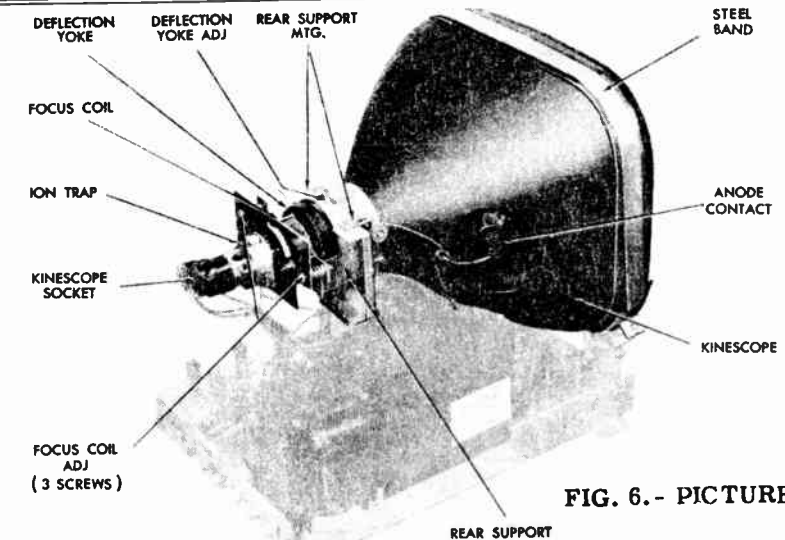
PICTURE TUBE MOUNTING DETAIL
